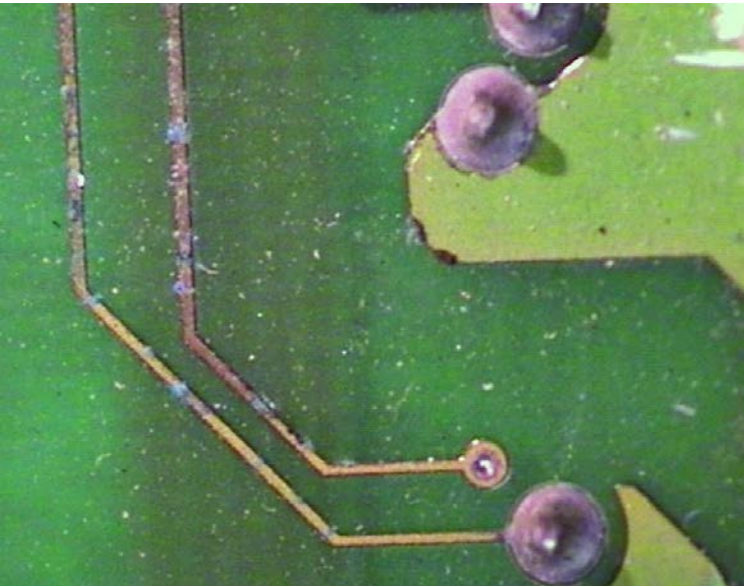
Corrosion of copper circuitry on PCB.
